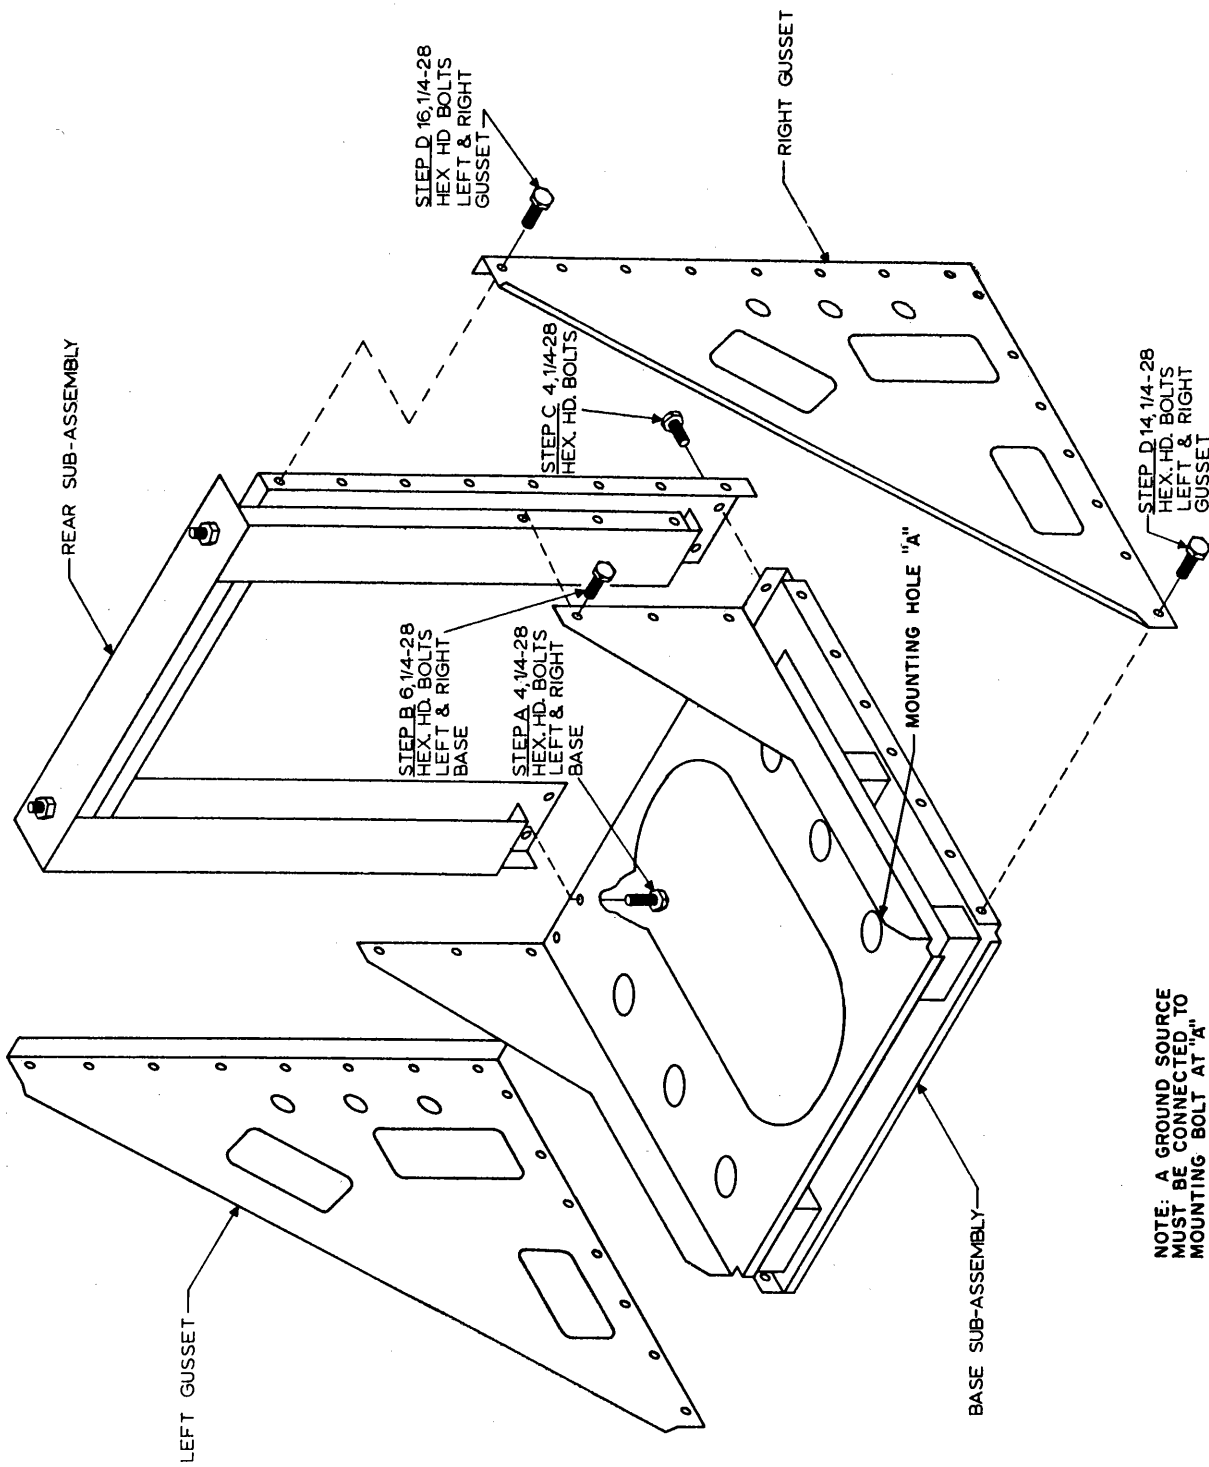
Mounting MT-2293A/WRR-2, Assembly Details
